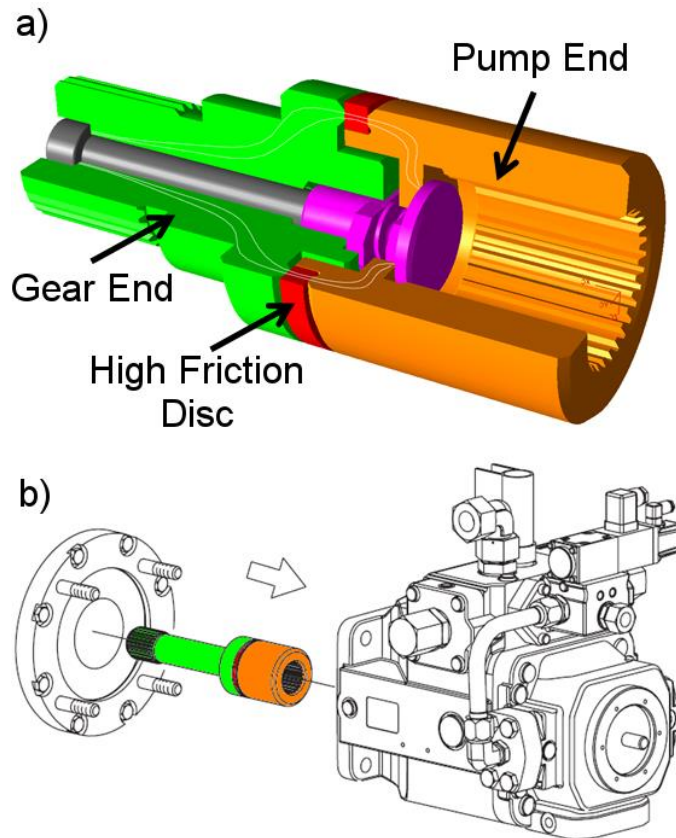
(a) Schematic of the driveshaft, highlighting the location of the friction disc in red in relation to the pump and gear ends and (b) the location of the driveshaft assembly within the larger pump housing
